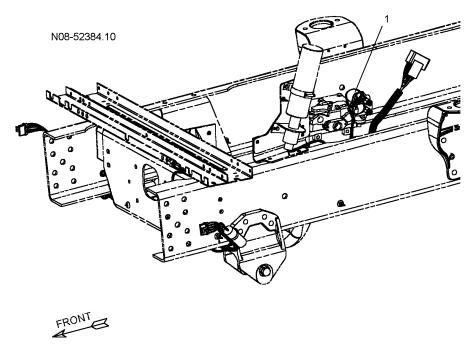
Auxiliary Air Pressure Gauge Transducer Location
